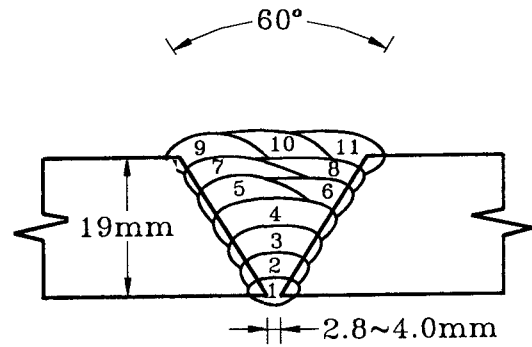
Schematic diagram of specimen and welding procedure
